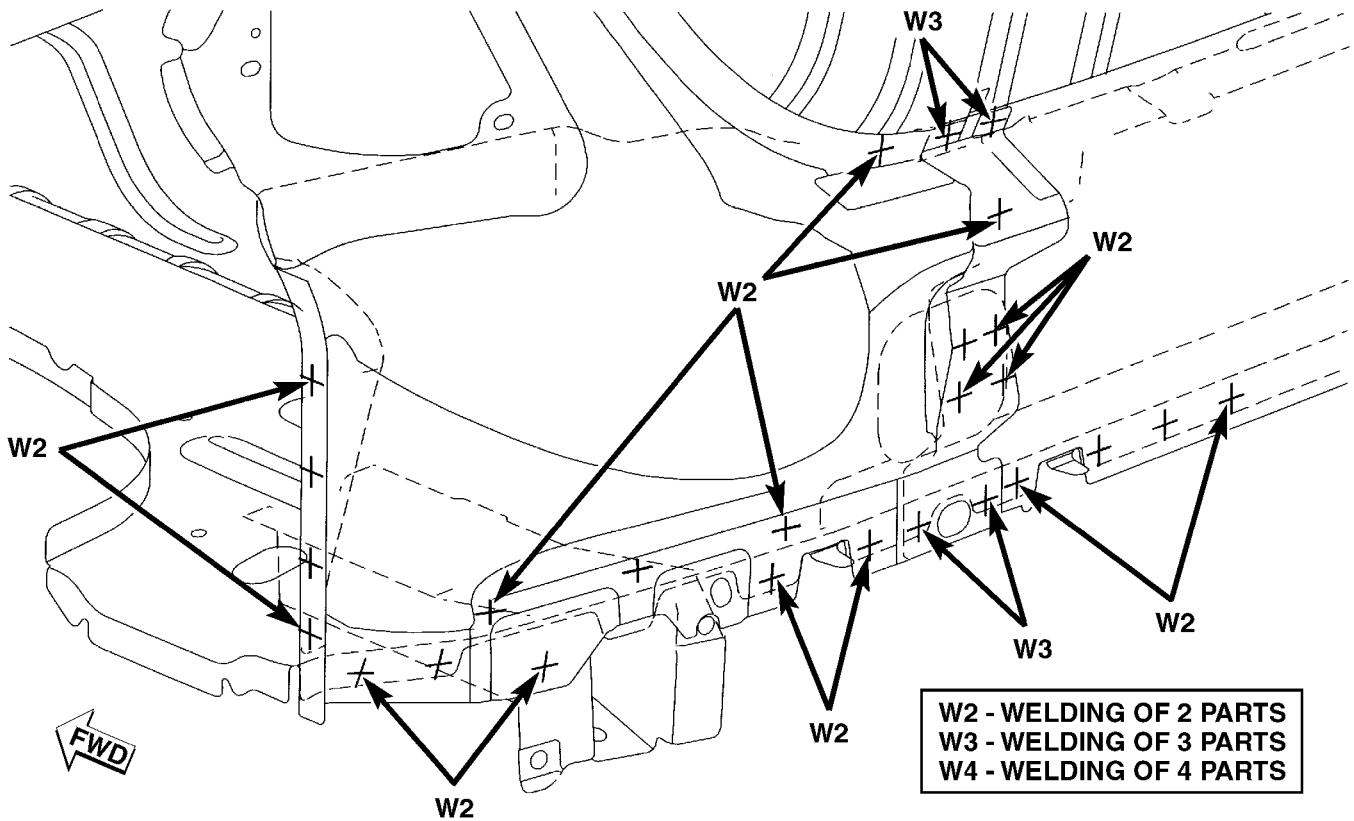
LOWER DECK CLOSURE TO REAR FLOOR PAN
